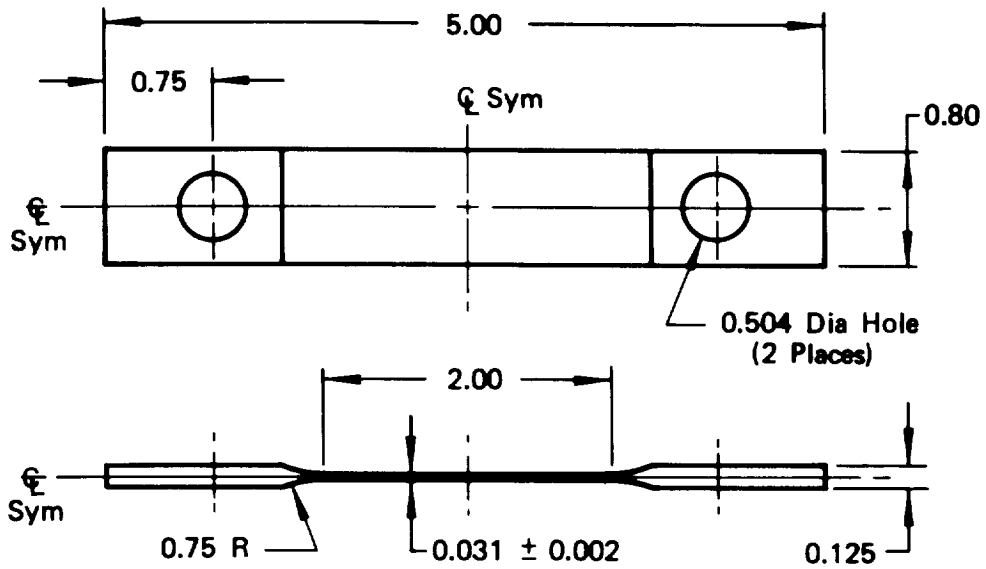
FORGING TENSILE SPECIMEN (PART II)
